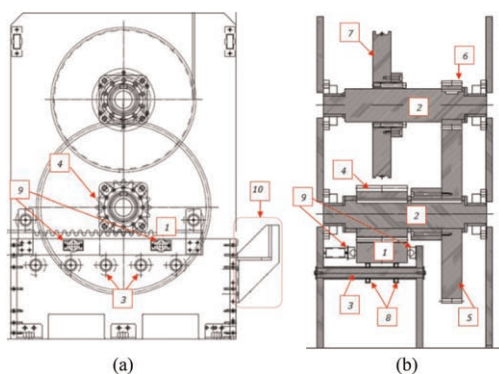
Longitudinal (a) and transverse (b) cross-sections of the system for the application of pullout load. 1) Gear rack; 2) Main axles; 3) Axles in support of gear rack; 4) Gearwheel 1; 5) Gearwheel 2; 6) Gearwheel 3; 7) Pulley; 8) Bearing in support of gear rack; 9) Gear rack lateral supports; 10) Shock absorber for gear rack.
